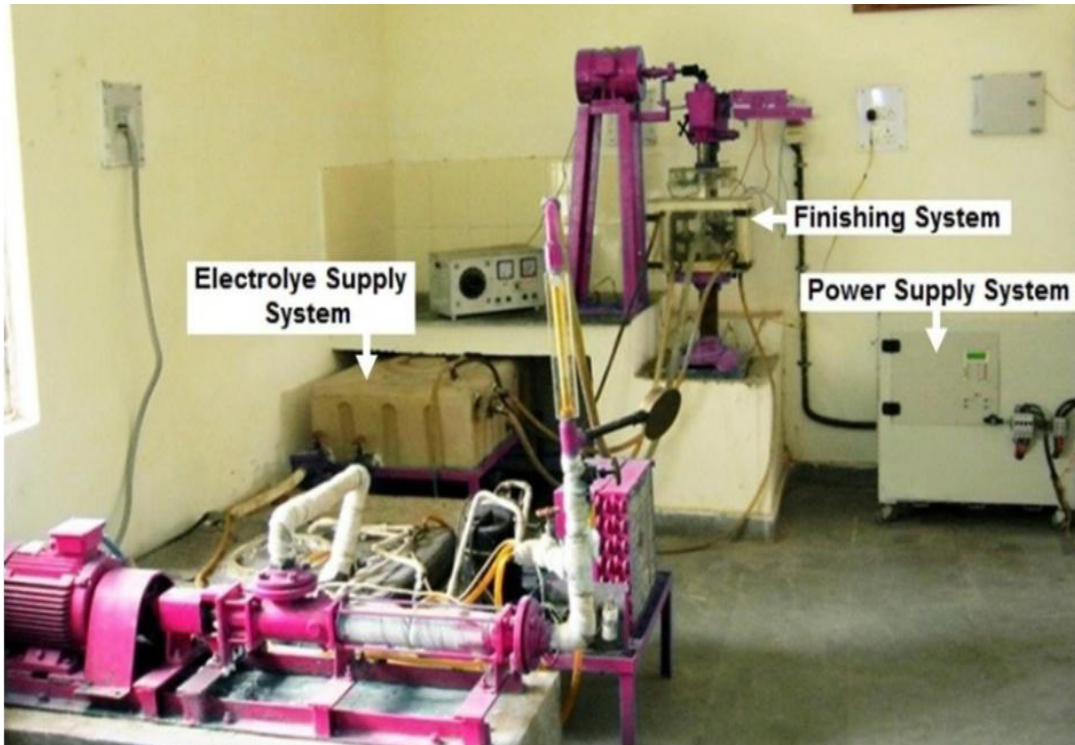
A photograph view of developed experimental setup of ECH of spur gear.
